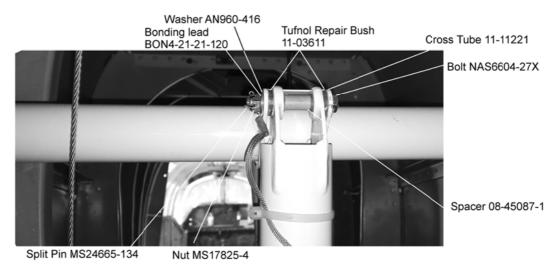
ELEVATOR PIVOT JOINT – WITH REPAIR P/N'S
